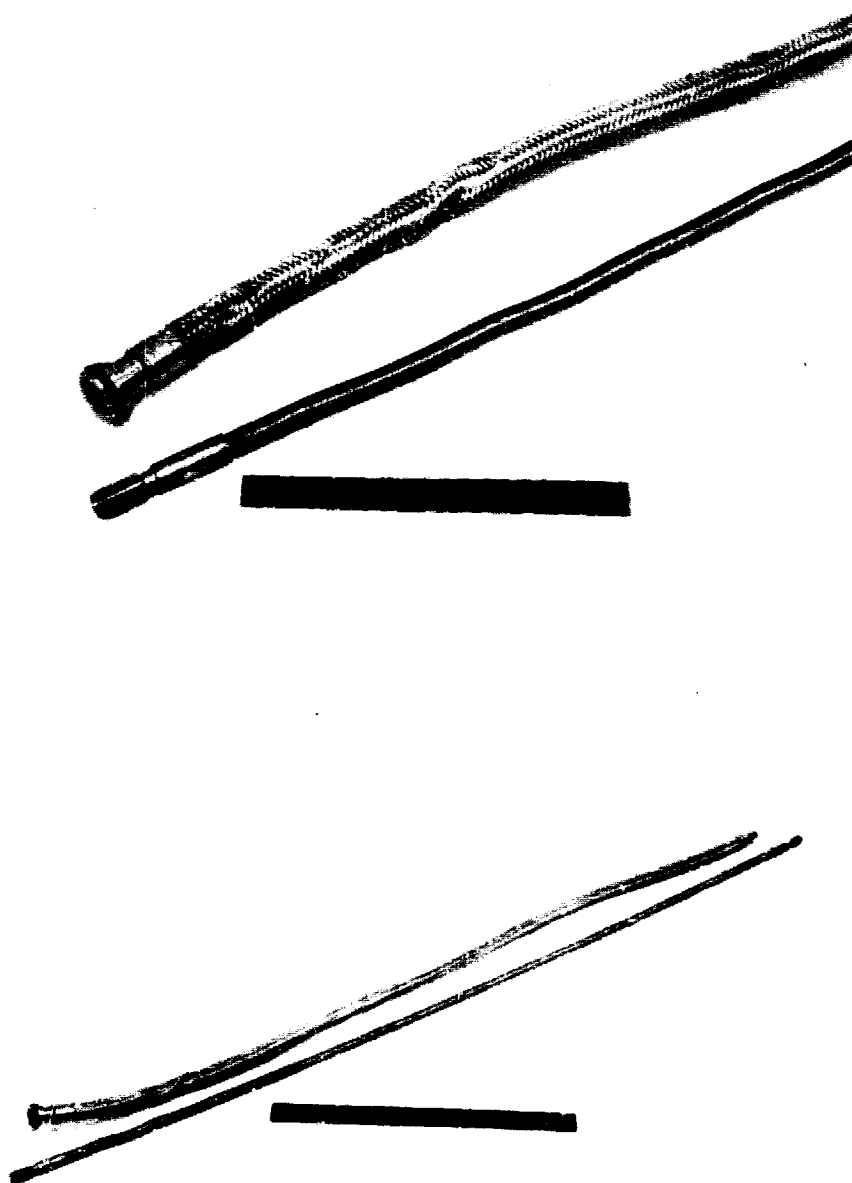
763402-1 FLEXIBLE SHAFT
